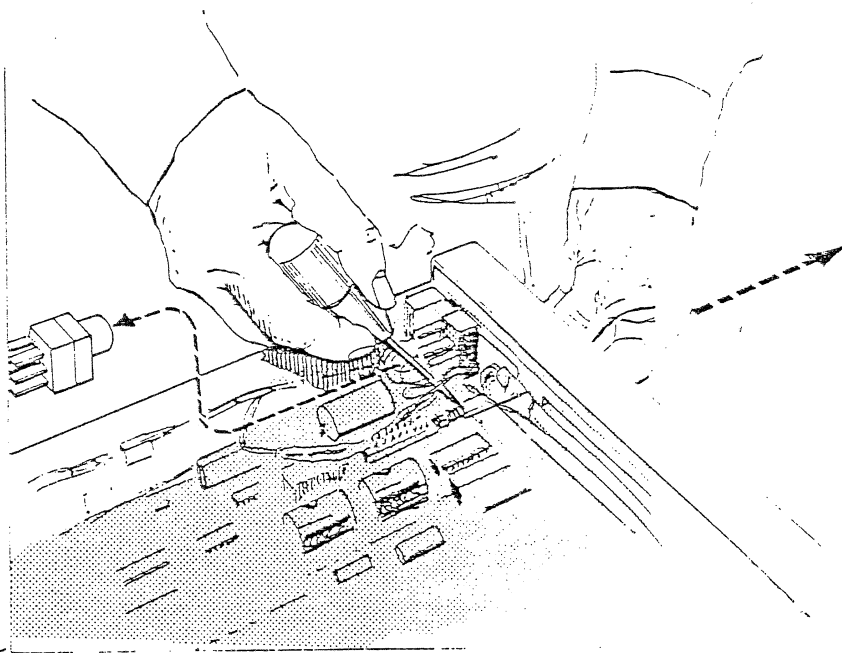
Exploded View of Instrument Showing Front Panel Removal
